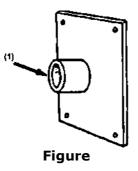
DETAILS OF HOW TO MAKE WHEELCHAIR PARTS (can be used with many wheelchair designs)
